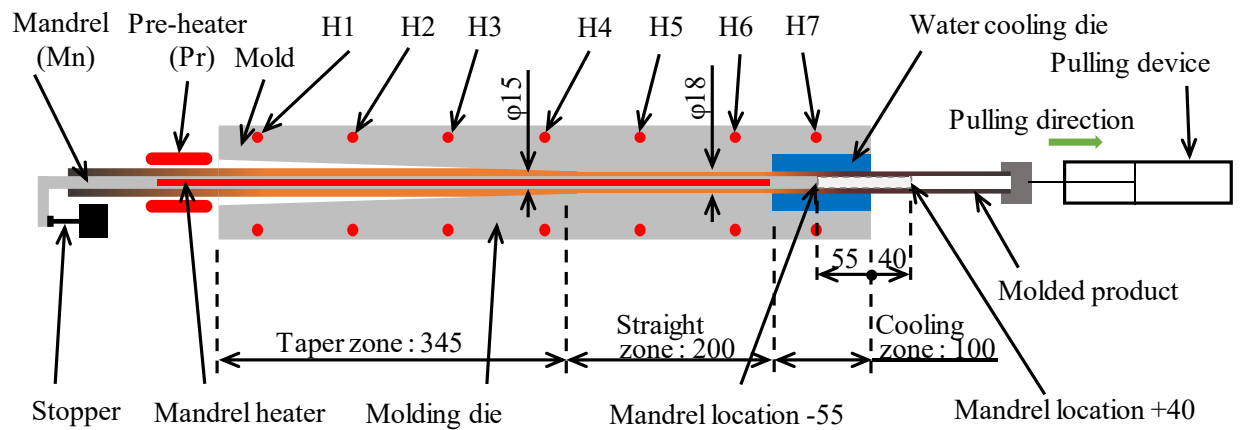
Schematic diagram of the pultrusion molding machine.
